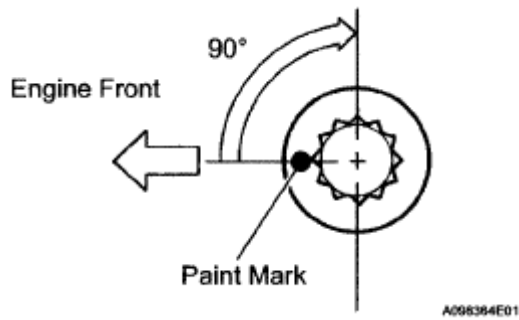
Identifying Cylinder Head Bolts Paint Mark
